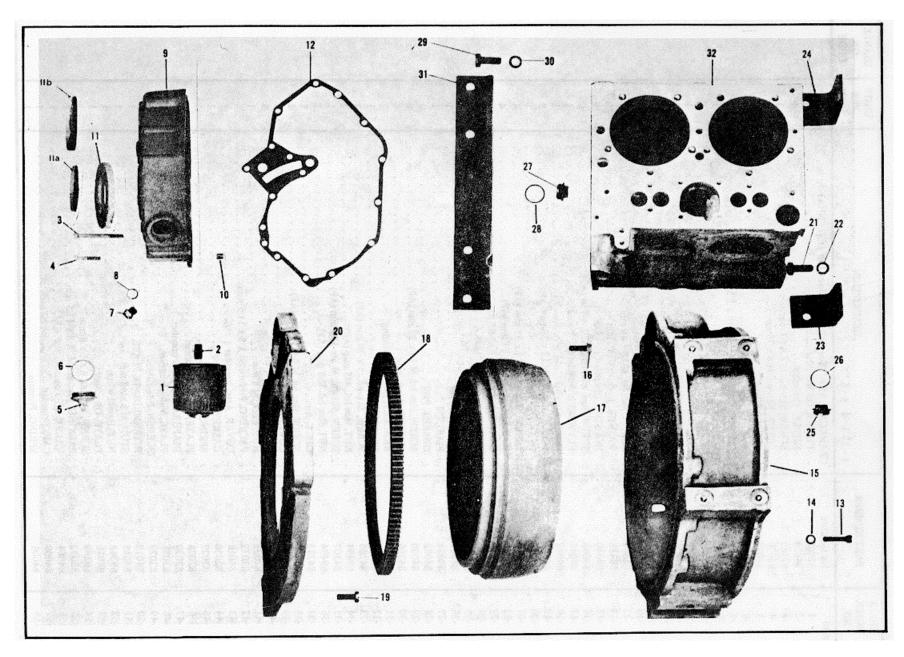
Crankcase Assembly (Sheet 5 of 10
